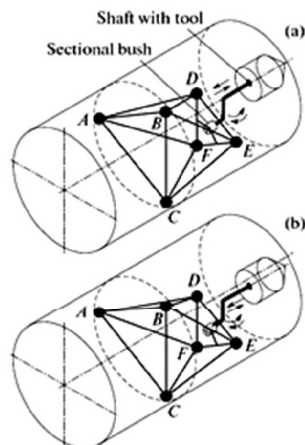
Rotation of a machining tool by means of octahedral module $ABCDEF$: (a) rotation coaxial with the module's symmetry axis; (b) eccentric rotation
